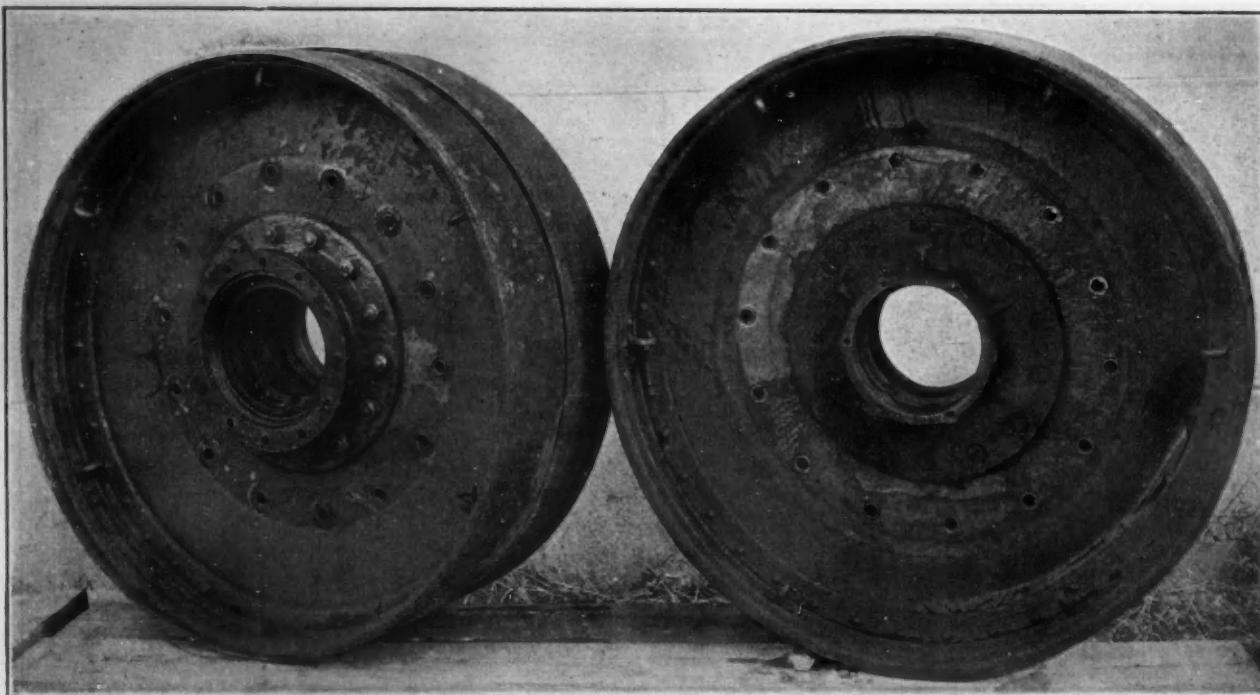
APPEARANCE OF THE STEEL-DISC WHEEL AFTER THE TESTS
